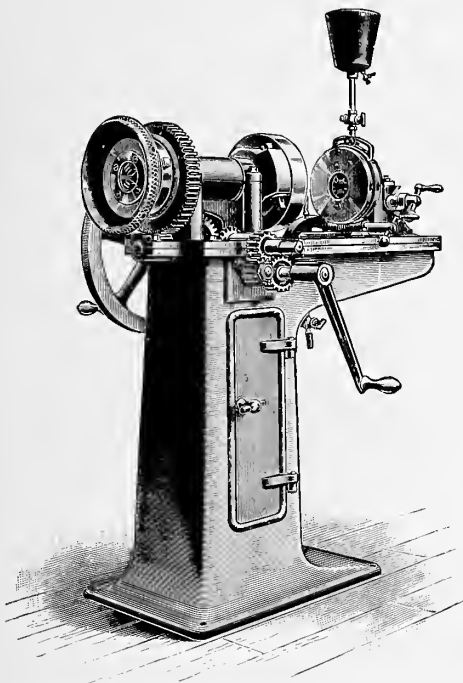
JARECKI HAND MACHINE, No. 6.
